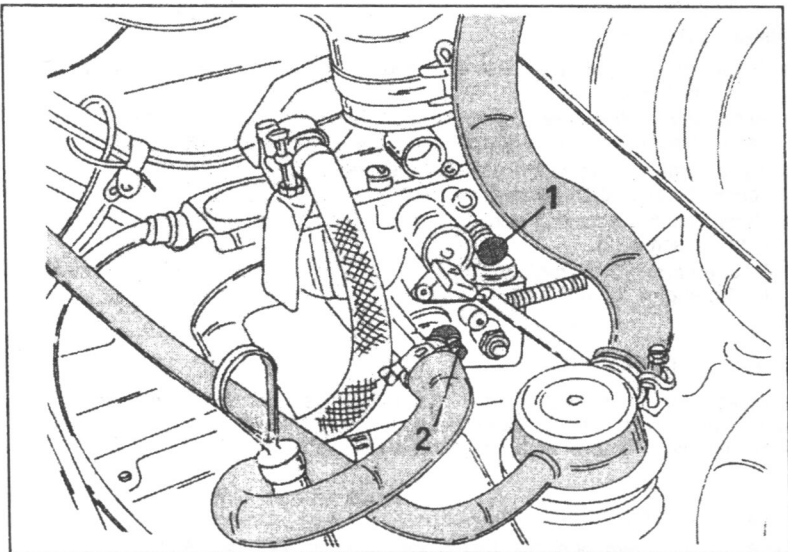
Throttle valve stop screw (1) and mixture adjusting screw (2).
